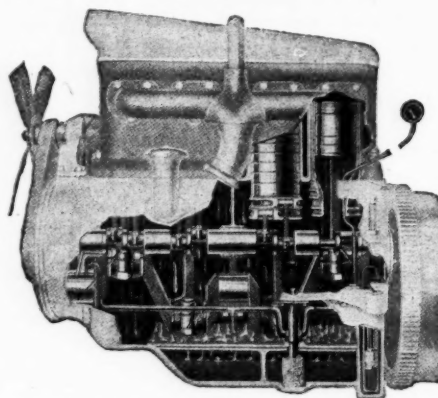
Cross-section of Willys-Knight engine, showing lubrication system
